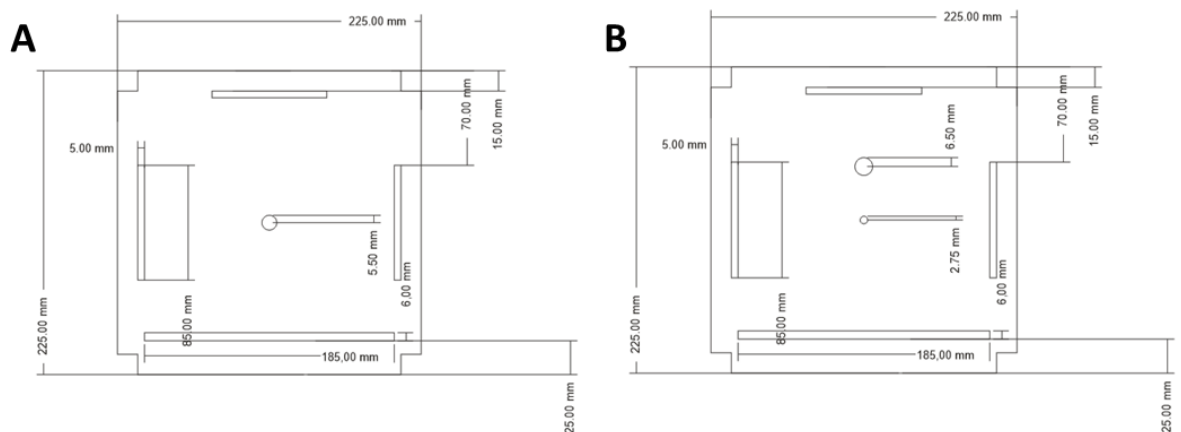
A minor change was made to the top panel, to allow coaxial printing with syringe pump placed directly on top of the encapsulator. A: original design. B: Revised design, with a smaller central hole to fit 1 ml syringes and a large hole to the side to accommodate 5 ml syringes.
